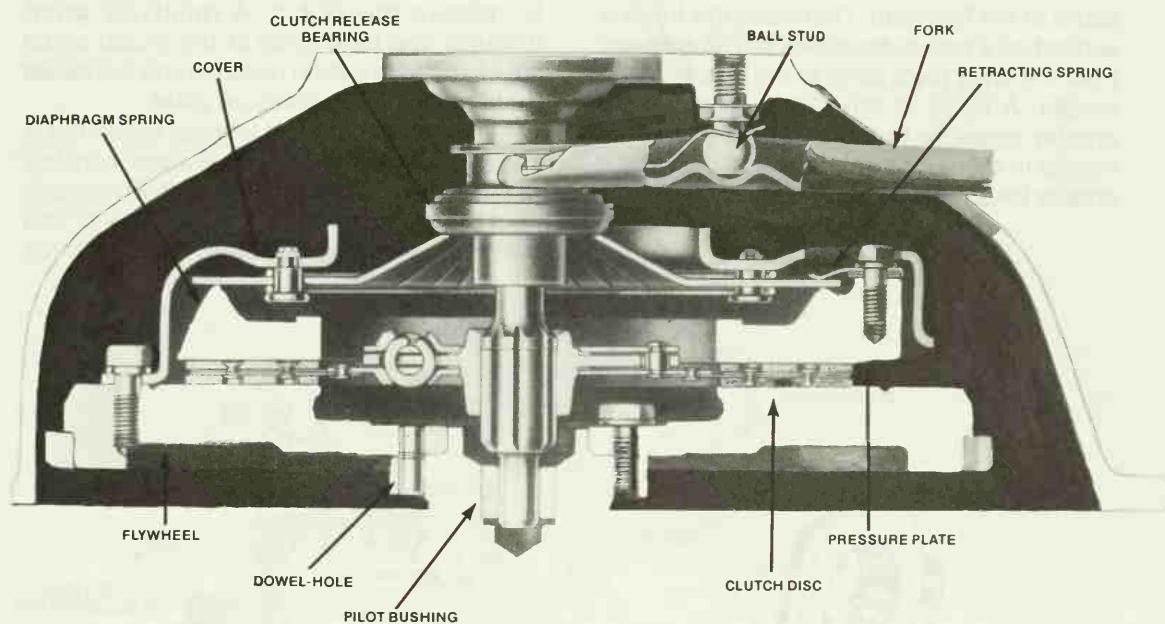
Cross-sectional view of a diaphragm-spring pressure plate and disc assembly. (General Motors Corporation)
